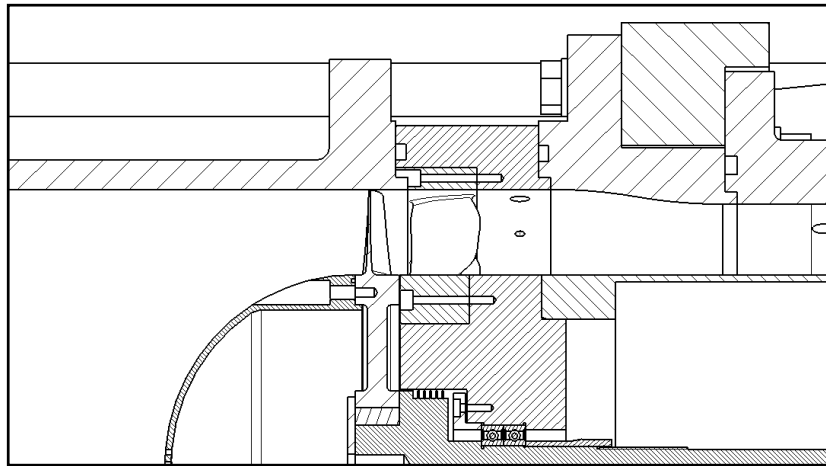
Casing Geometry given by the already existing Rings of the Measurement Section.
